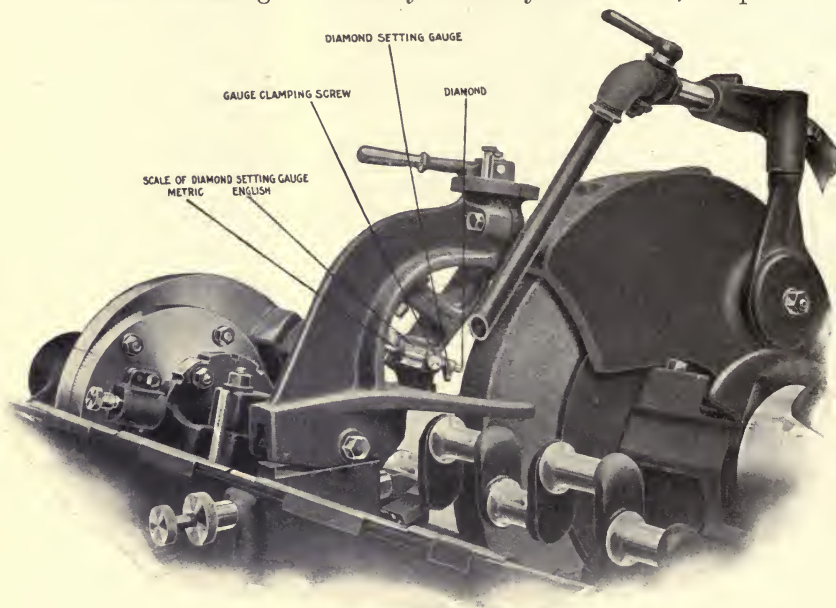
RADIUS TRUER AND CRANK SHAFT—LANDIS
